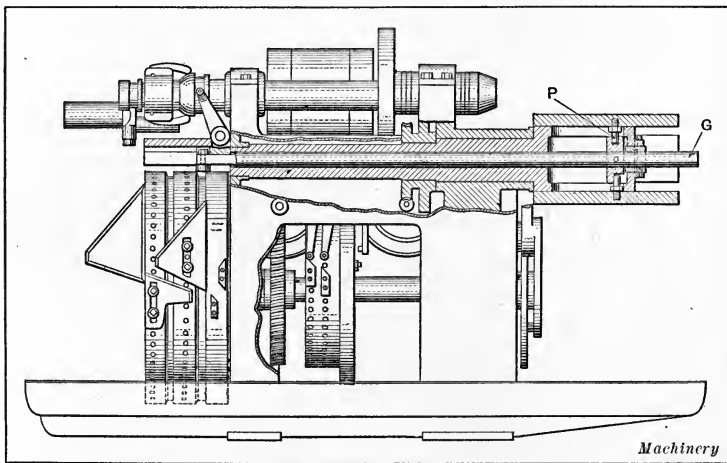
Sectional View showing Method of Supporting Turret and Operating Tool-slides
